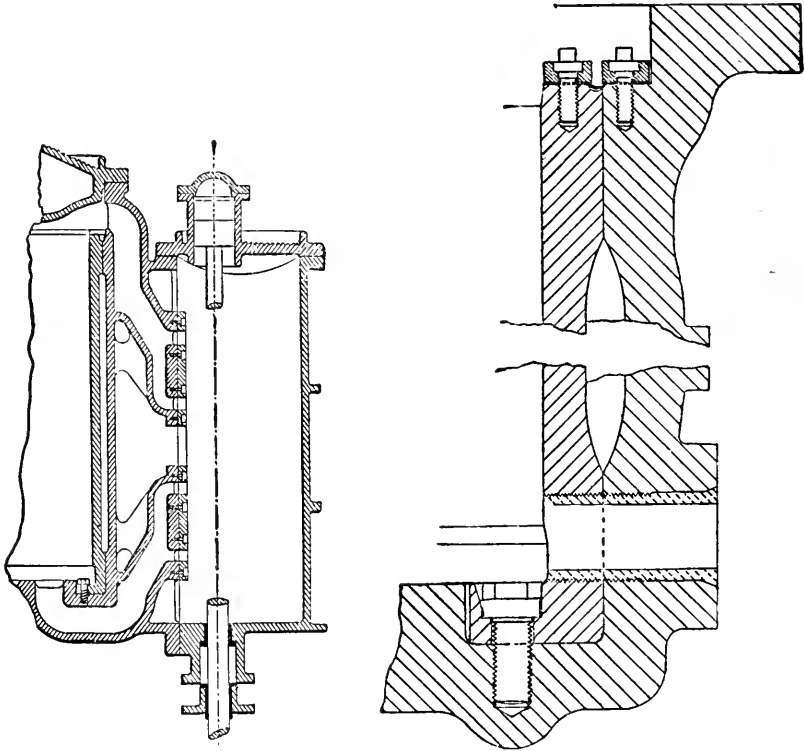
Section through Cylinder. Fig. 78a.—Admiralty Method of Fitting Liners.
